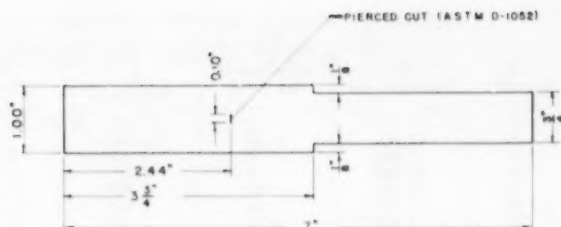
Test Specimen Used for Plastics in the Ross Flexing Machine.
